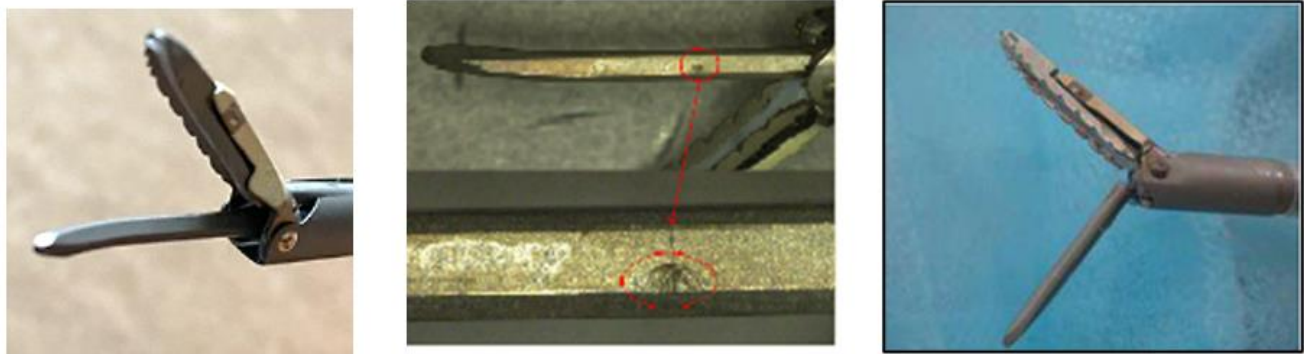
Example of Thunderbeat Probe in accordance with specifications (left), Cracked Probe (Center) and Probe Fracture (right)
